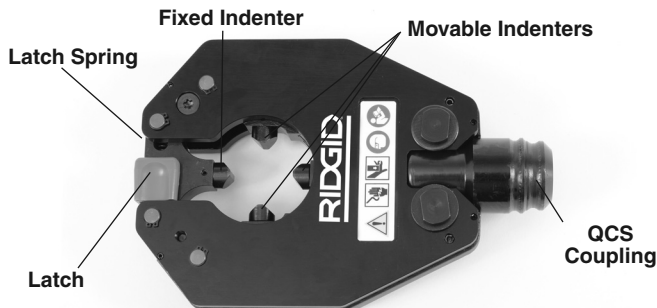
4P-6 4PIN Dieless Crimp Head
